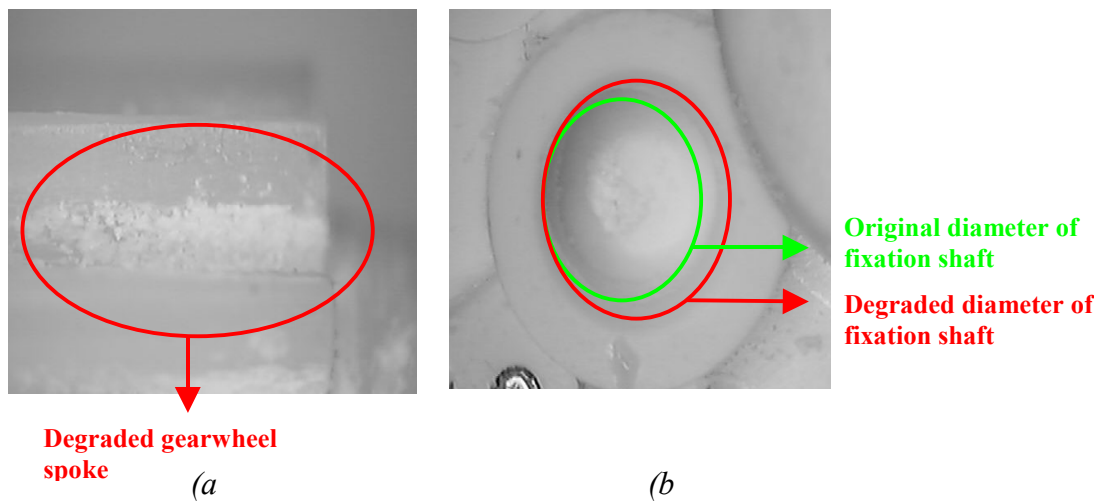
Degradation of the motor gearbox [VIS04]:
